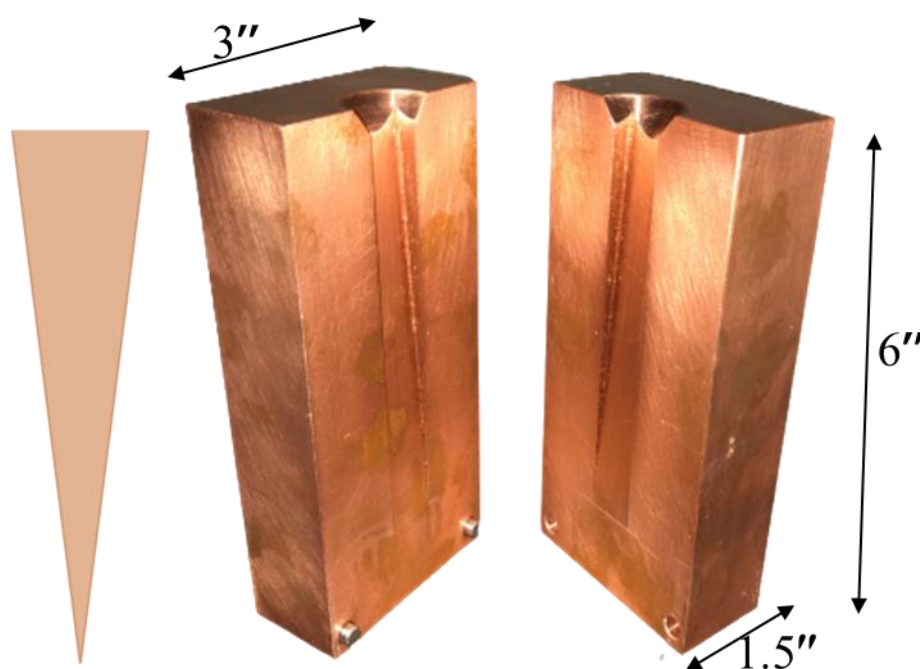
The copper wedge mold consists of two halves joined to make a block.
